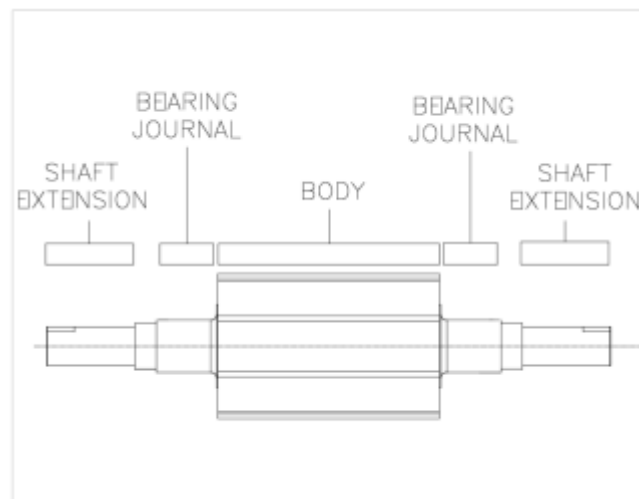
Rotor terminology. A High Pressure model rotor is shown.
